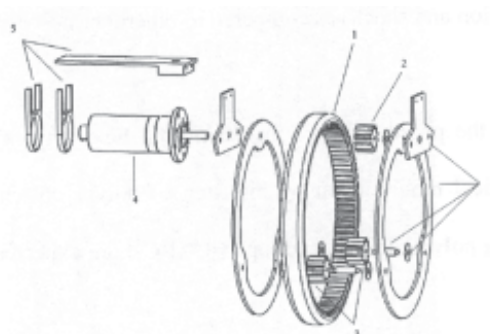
Components of the ground moving system (1 – internal spur gear, 2 – spur gear mounted on the motor axis, 3 - spur gears for supporting the drone weight, 4 – brushless electrical motor, 5, support elements for the motor, 6 – fixtures elements)
